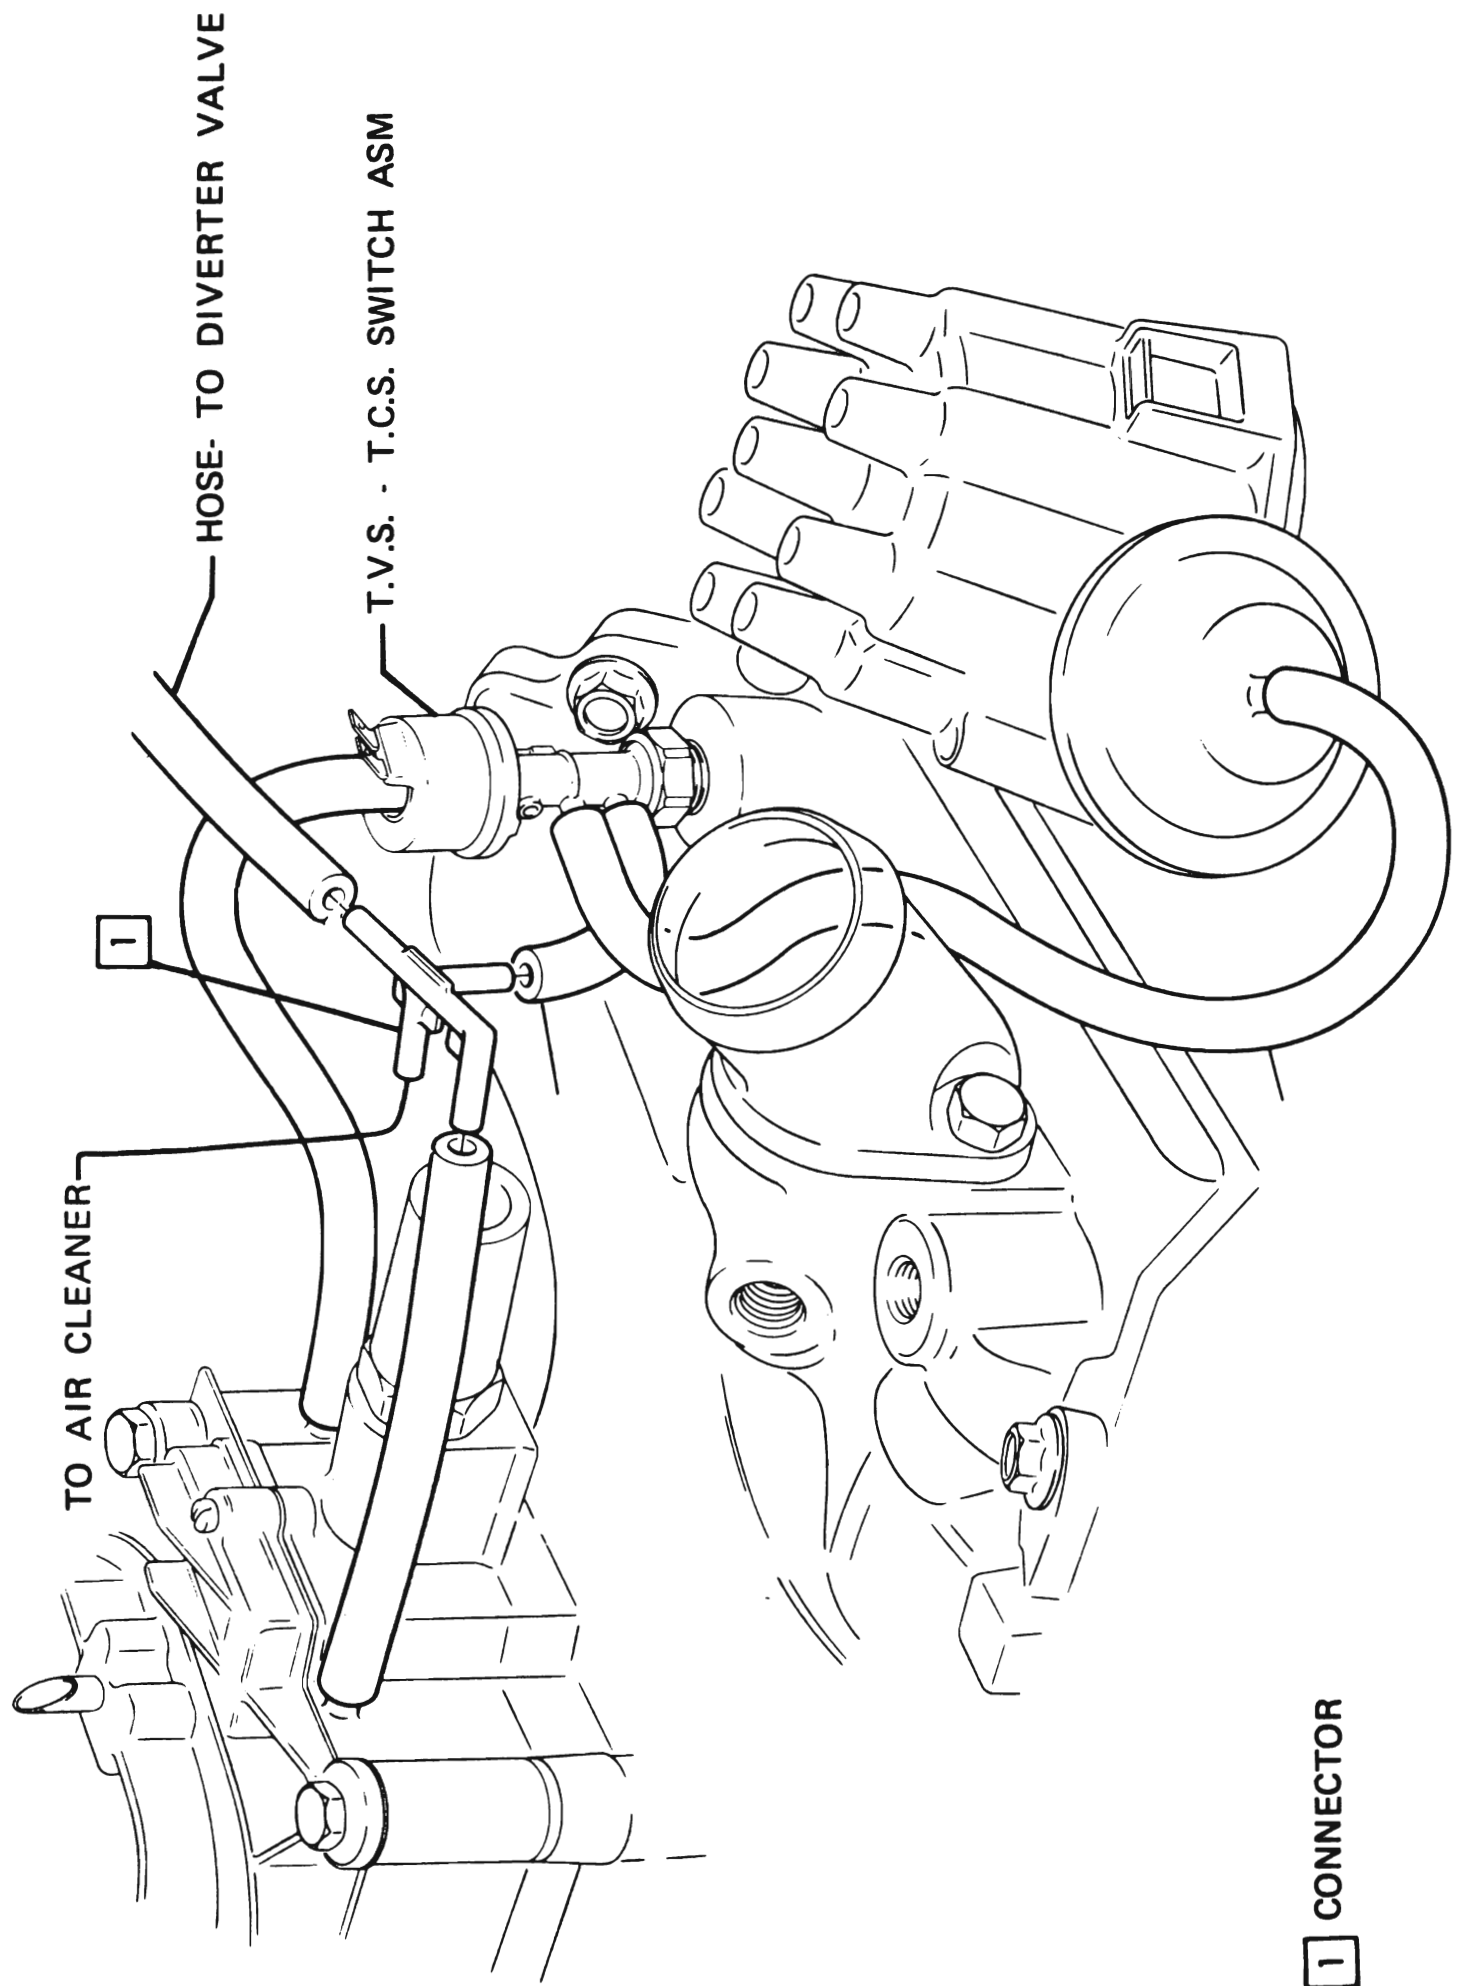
Vacuum Tube Routing - 455 Engine - 4L-4N-4R-4P-4U-4V-4Y Series
